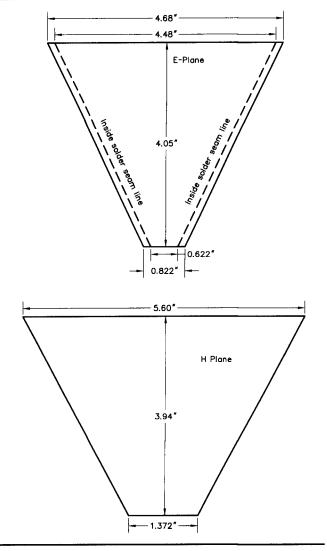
15.8-dBi 5760-MHz horn dimensions. The horn solders to WR-137 waveguide. The dotted line marks the inside solder seam.
